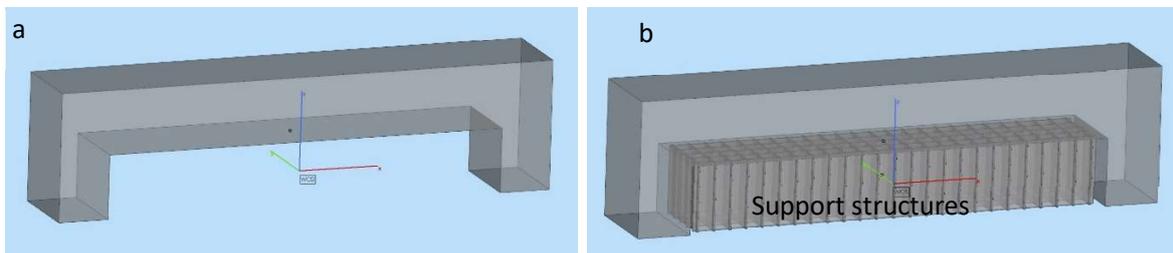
(a) CAD design of a part in simply supported beam configuration (b) CAD design of a simple supported beam part with support structures.
